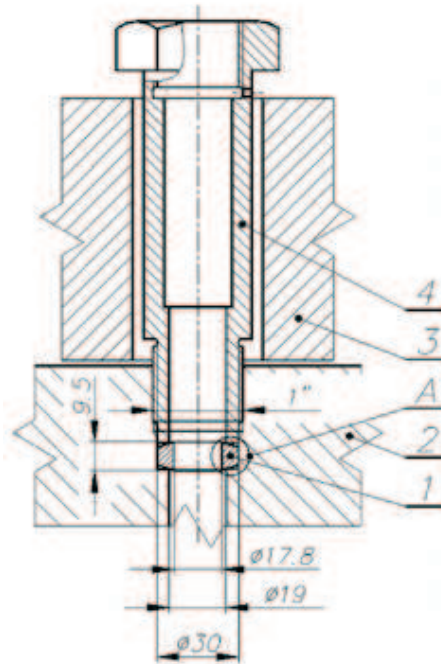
Engineering example of the closure with the “2-delta” gasket: 1 – metal “2-delta” gasket, 2 – reactor vessel, 3 – clamping ring, 4 – screw joint
